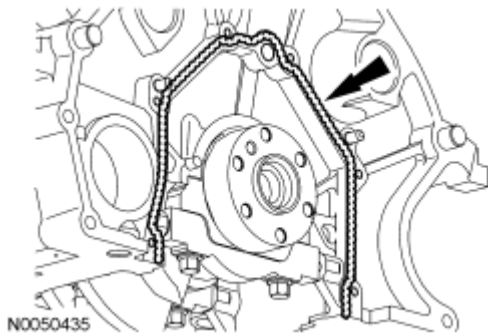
Applying Bead Of Gasket Maker To Rear Crankshaft Seal Retainer
